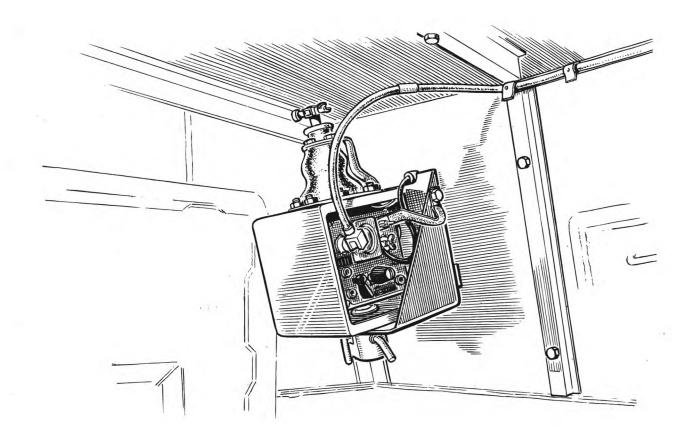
DISMOUNTABLE VHF ATU ASSEMBLY SHOWN IN THE LH REAR CORNER
